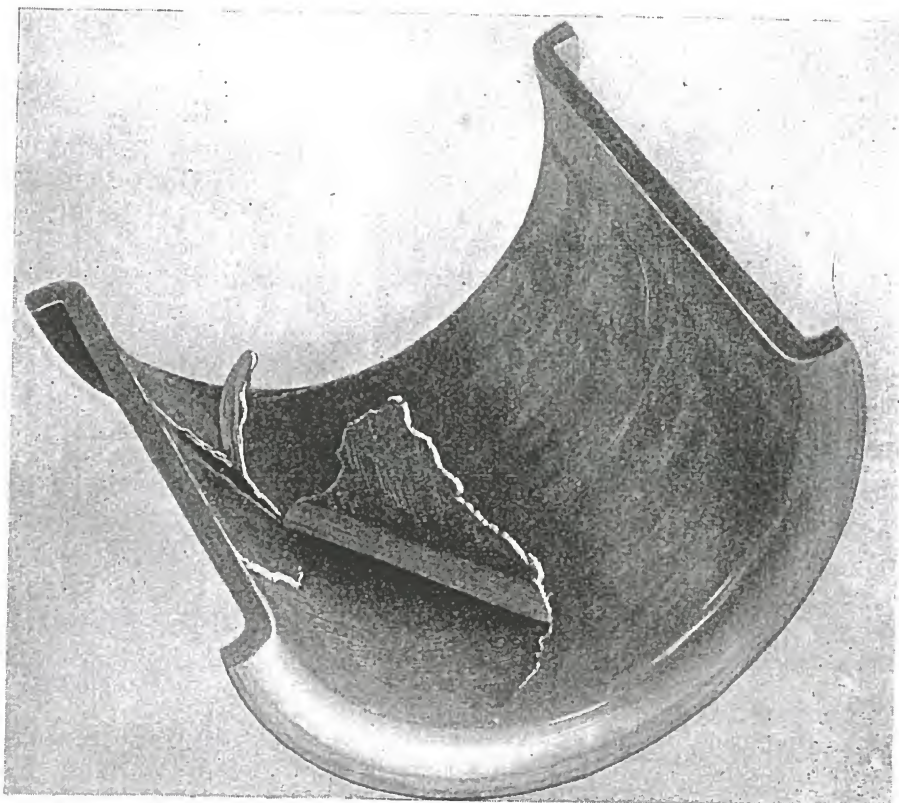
PLATE Vd. FINISHED BEARING SHELL SHOWING FAULTY ADHESION
